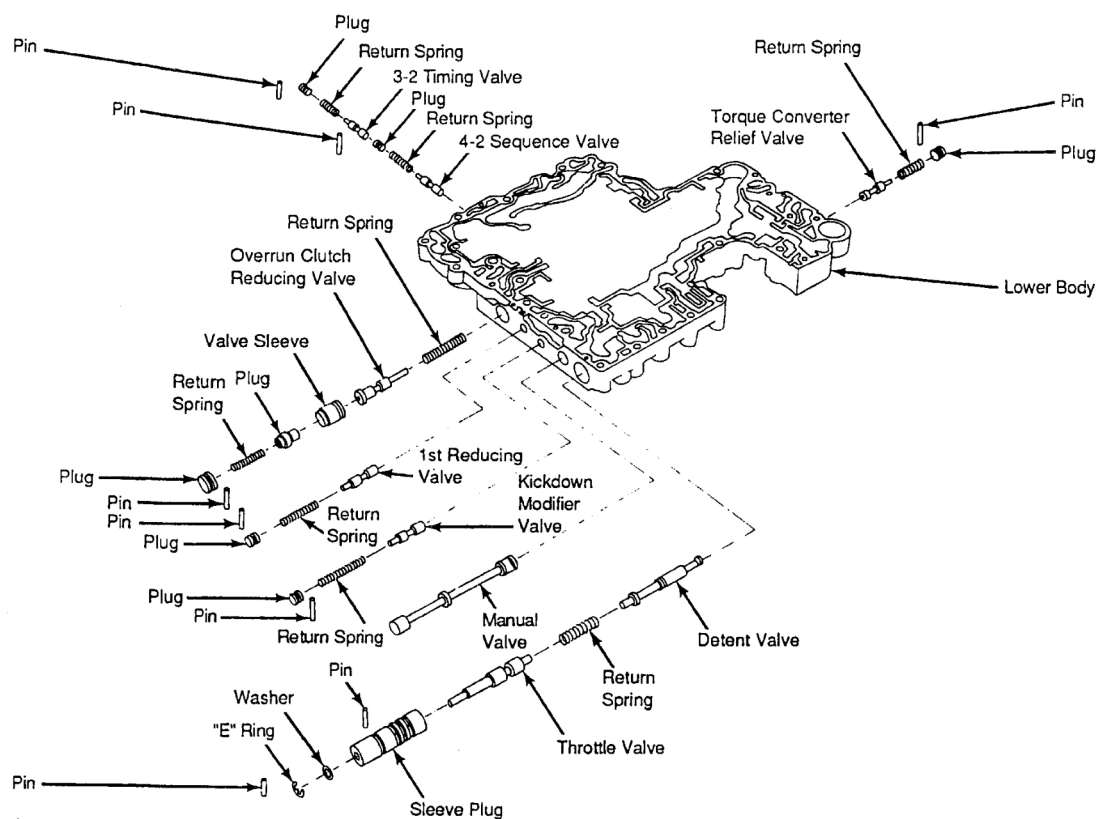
Exploded View Of Control Valve Lower Body (RL4R01A)
